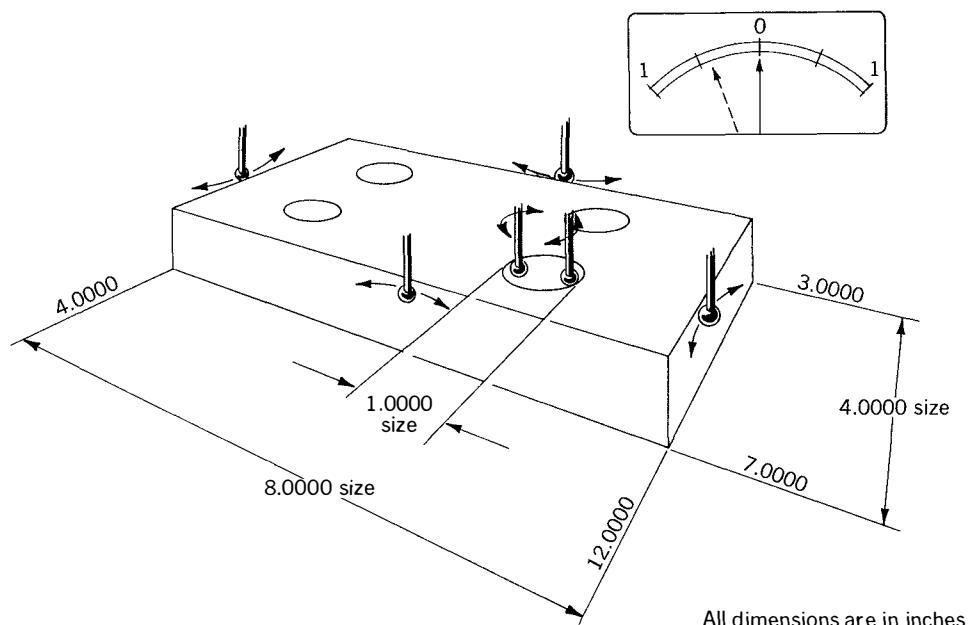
The demonstration piece is used here to show how the Universal Measuring Machine may be used to perform a variety of absolute measurements. All these measurements may be accomplished once a "zero" is set with the indicator on an edge directly on the spindle axis.
